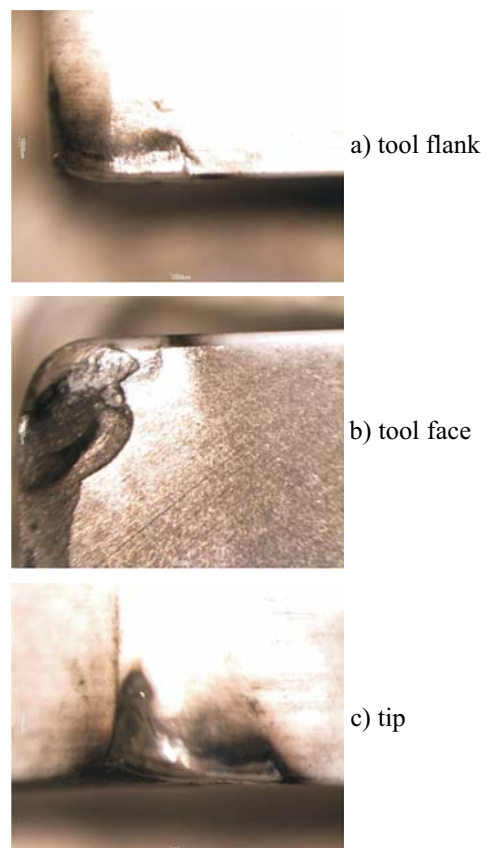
Tool wear – indexable cutting insert type D 250\_1
